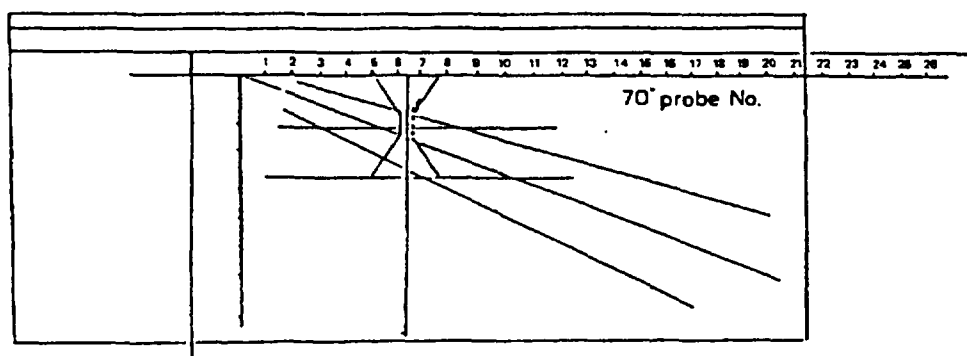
b : Flaw size in a weld as indicated on the flaw location slide.
